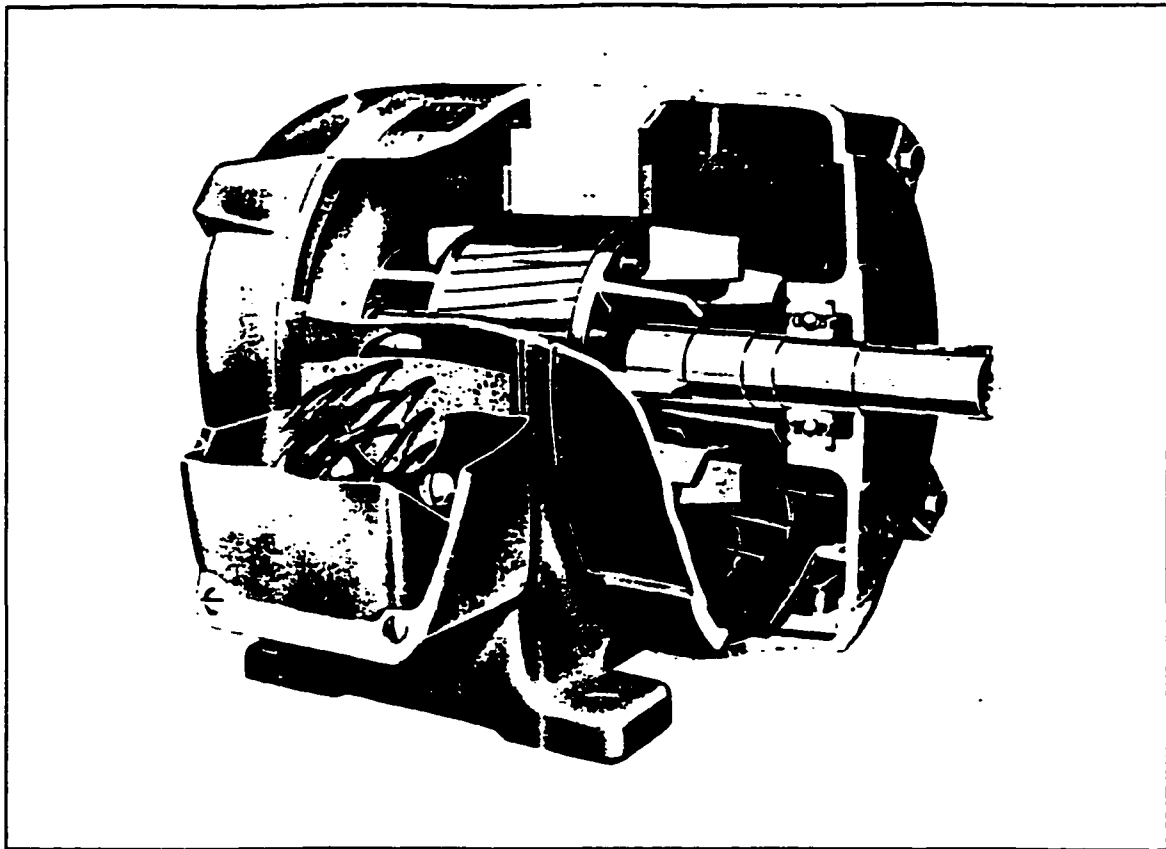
Cutaway view of an AC induction motor with squirrel cage rotor.
